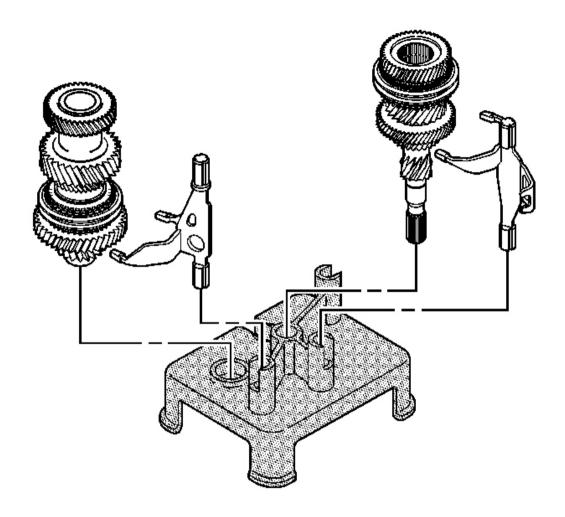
View Of Gear Assemblies & Shift Forks Courtesy of GENERAL MOTORS CORP.
